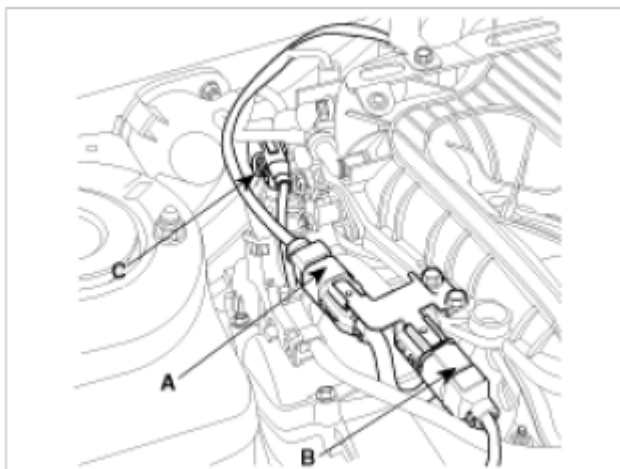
Identifying RH Injector Connector, Ignition Coil Connector And VIS Connector
